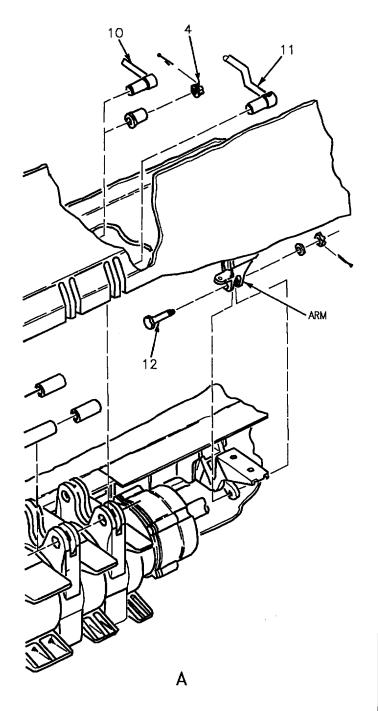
Removal of Outer Wing with Damaged Wing Fold Transmission (Sheet 3)
